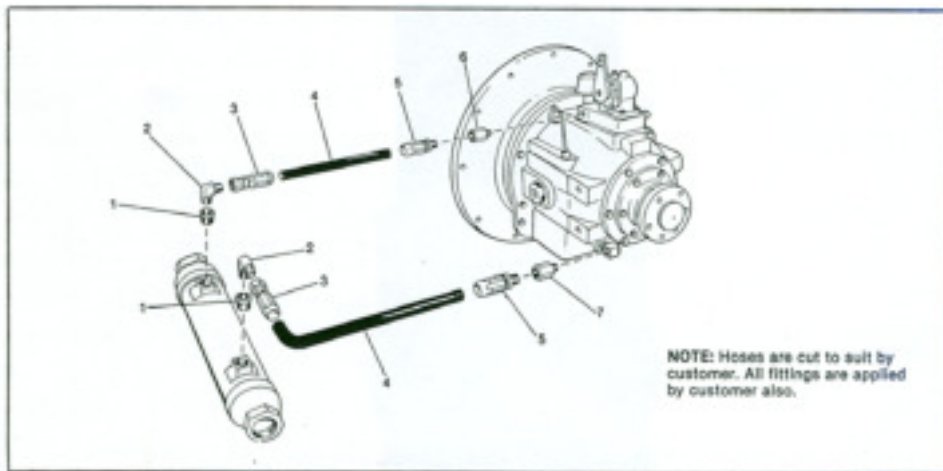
Hose and Fitting Kit (oil cooler not included in kit)
